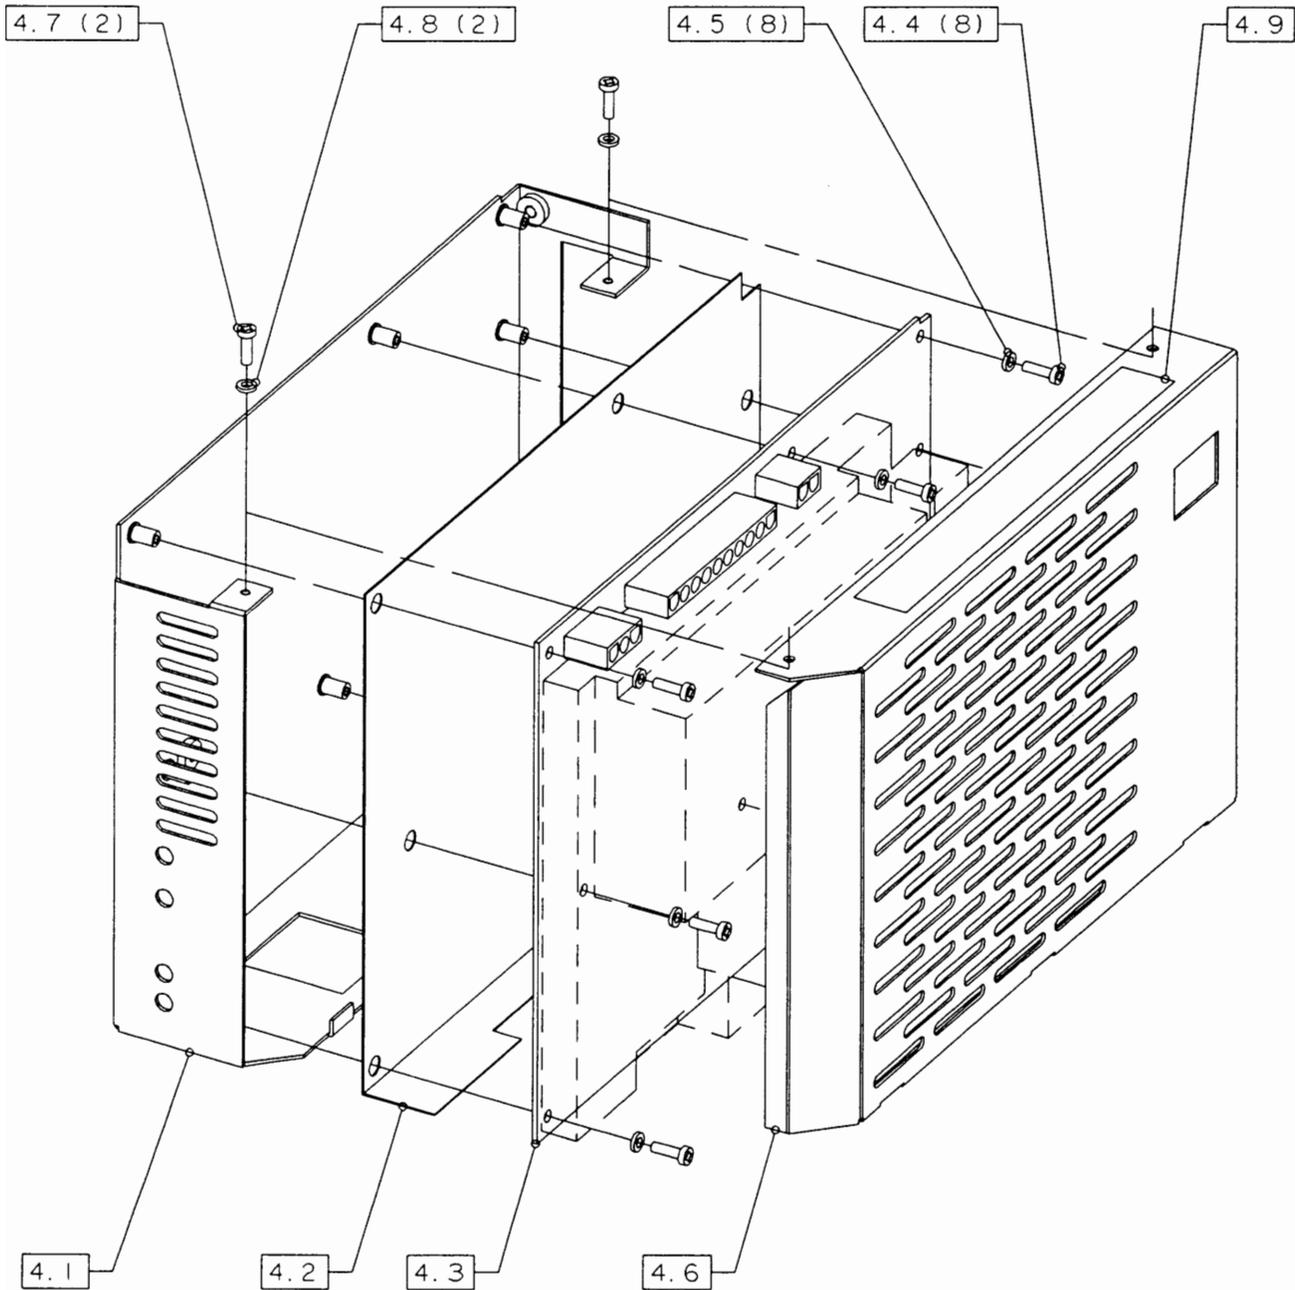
93XX-PS1715 Power Supply Exploded View
